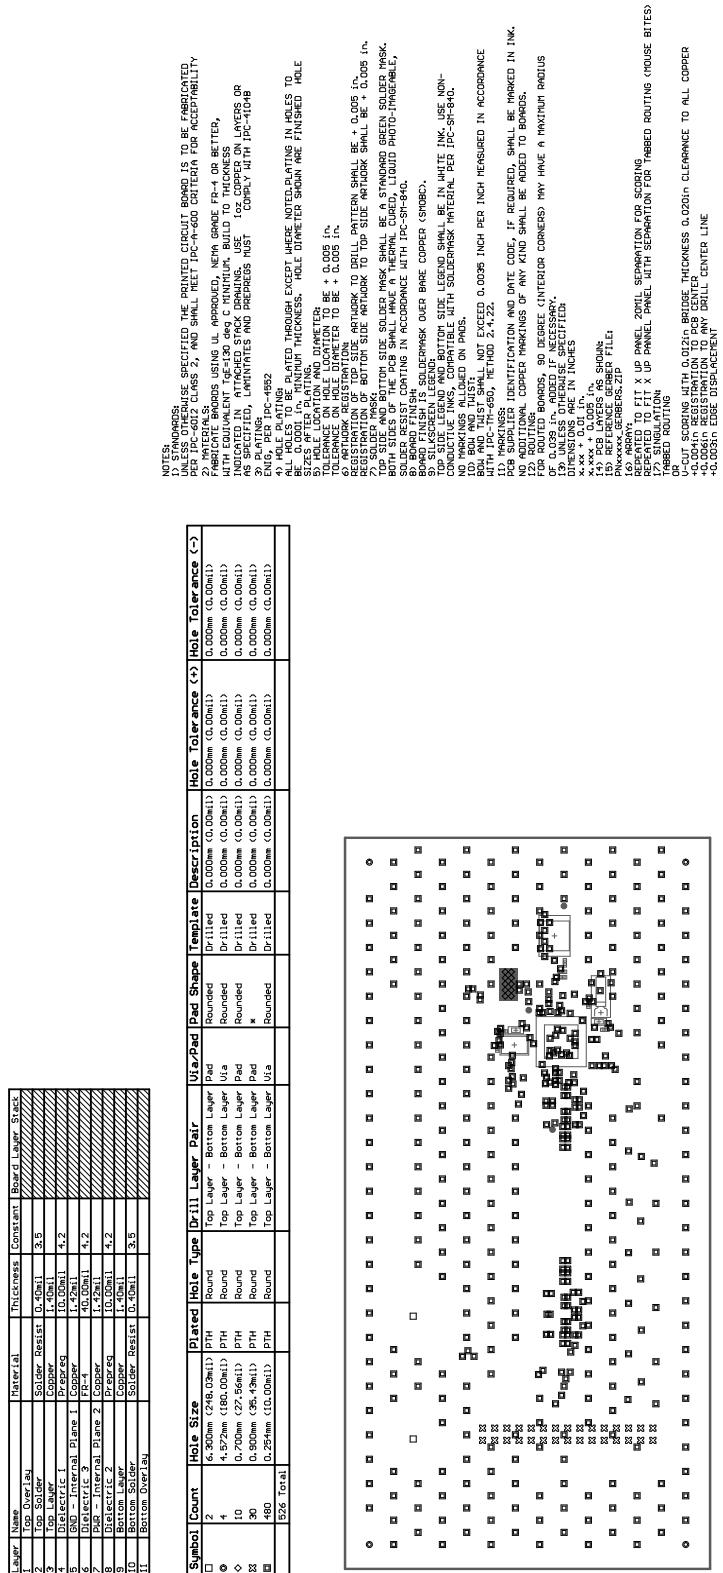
Embedded capacitance 4-layer design, mechanical drawing top.
